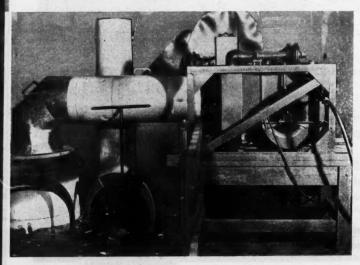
The Interior of the Liner is Heated by Means of a Portable Electric Hot-Air Furnace
